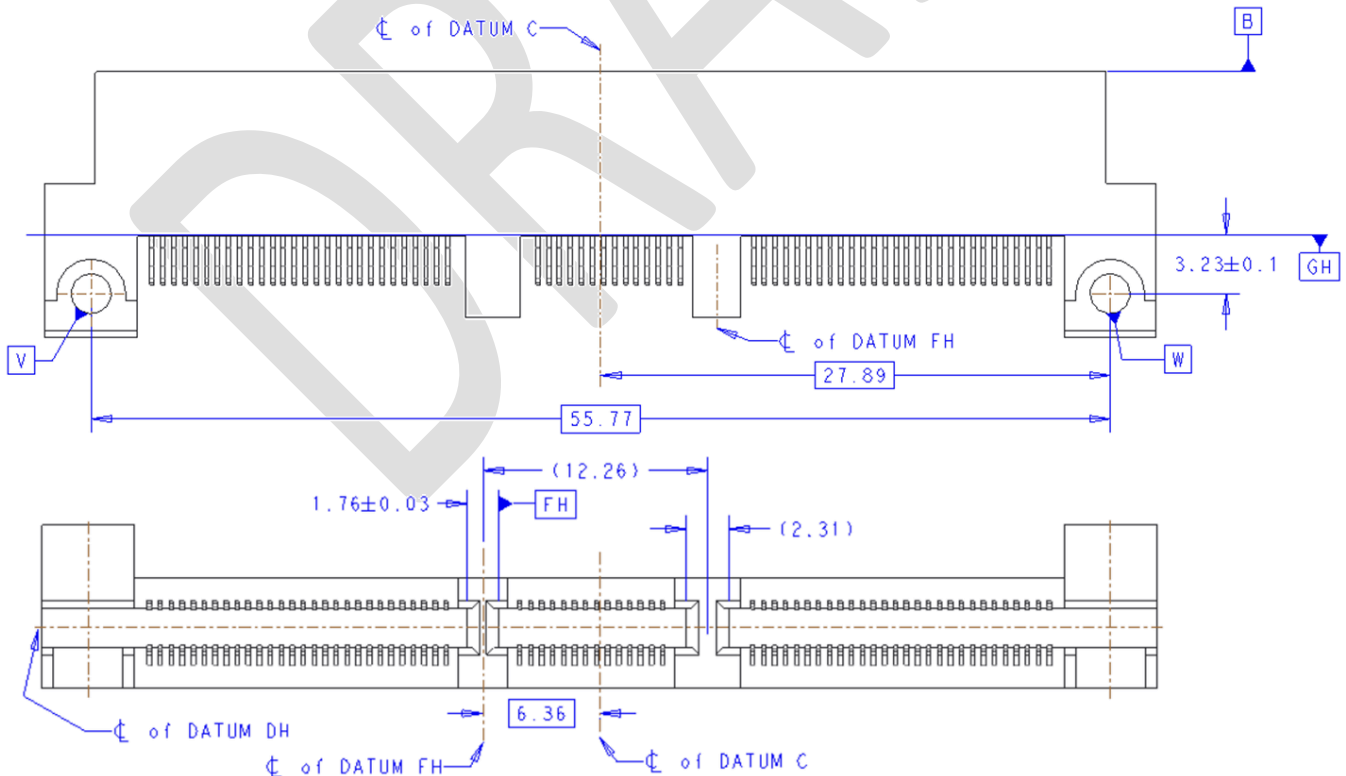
4C STRADDLE MOUNT CONNECTOR DIMENSIONS – REAR VIEW (MM)
